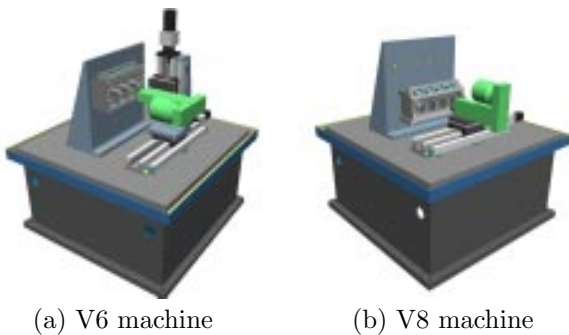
Reconfigurable machine tool designs for the two different parts.
